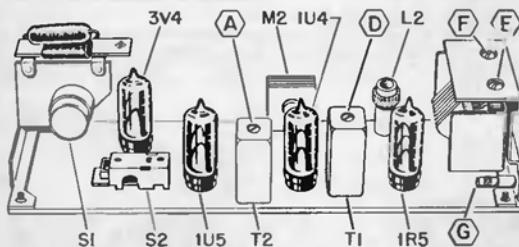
Top View of Chassis 200. Tube Locations and Alignment Points Shown.
